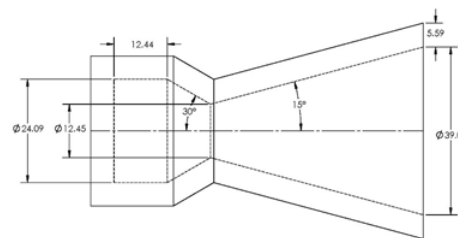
Detail drawing of the geometry from perfectly-expanded nozzle approach
